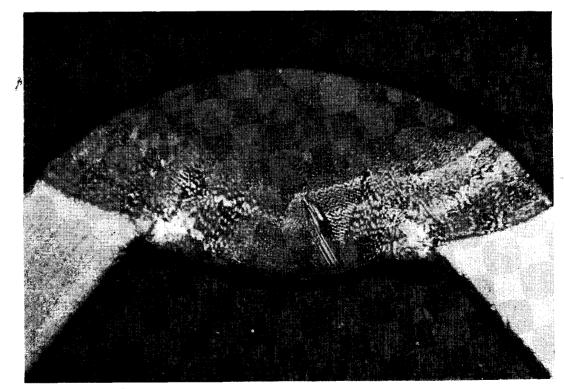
A REPAIRED WELD USING MODIFIED BACKING BAR
